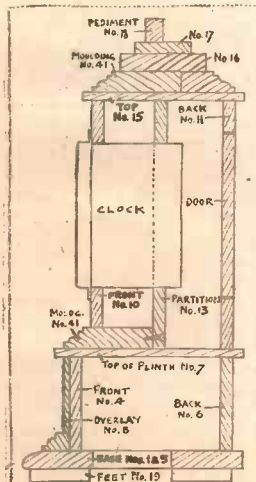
A helpful side view, showing position of parts numbered as on the design sheet.
